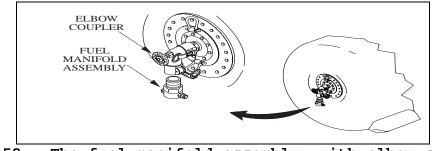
The fuel manifold assembly, with elbow coupler and adapter
